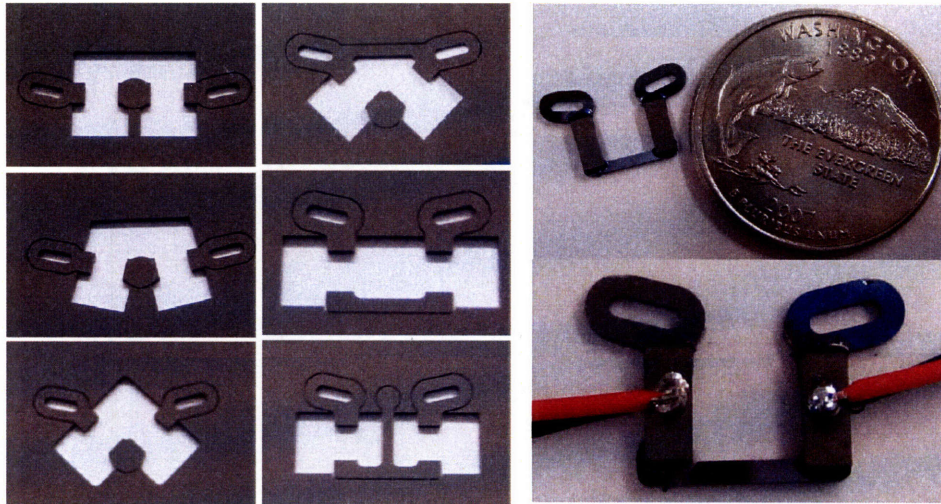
The 1st Mechanical Gyroscope Stimulator. Silicon parts are fabricated and kept on wafer (left); PZT benders are attached and the shackle is push off the wafer (top right); and wires are soldered to complete the assembly (bottom right).
